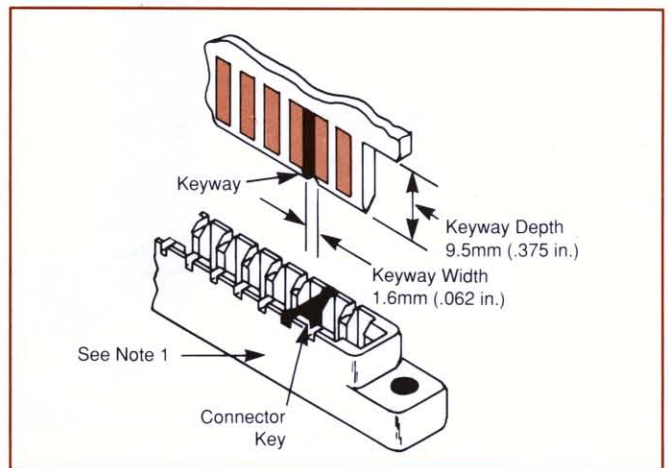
Outline and Installation Dimensions of Plug-in Units
